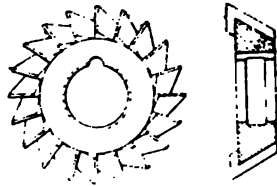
Usual Type of Cutter for Producing Teeth.
